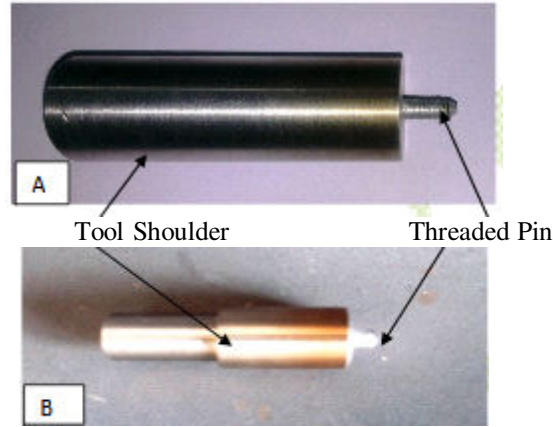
FSW Tools: (A) FSW tool of threading M8x1(B) FSW tool of threading M12x1.75
